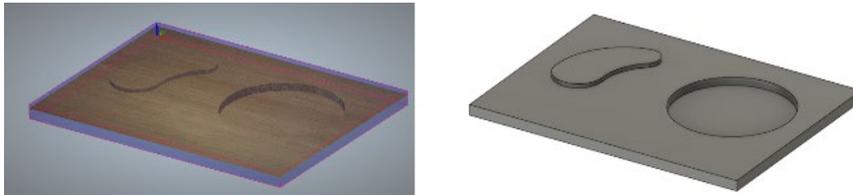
Sample part drawing in ArtCAM and Fusion 360
